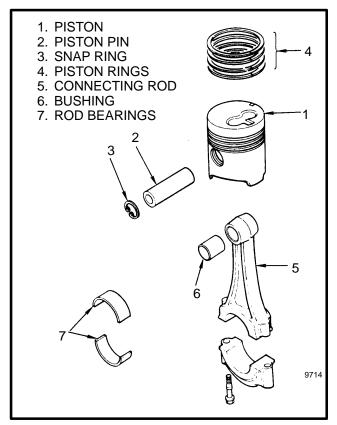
PISTON AND CONNECTING ROD ASSEMBLY
